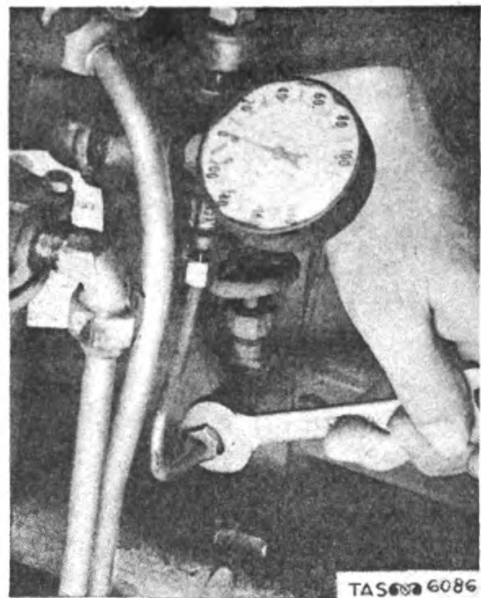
Removing Outer Discharge Tubing by Loosening Adapter Nuts at Base of Pressure Regulating Valve.
